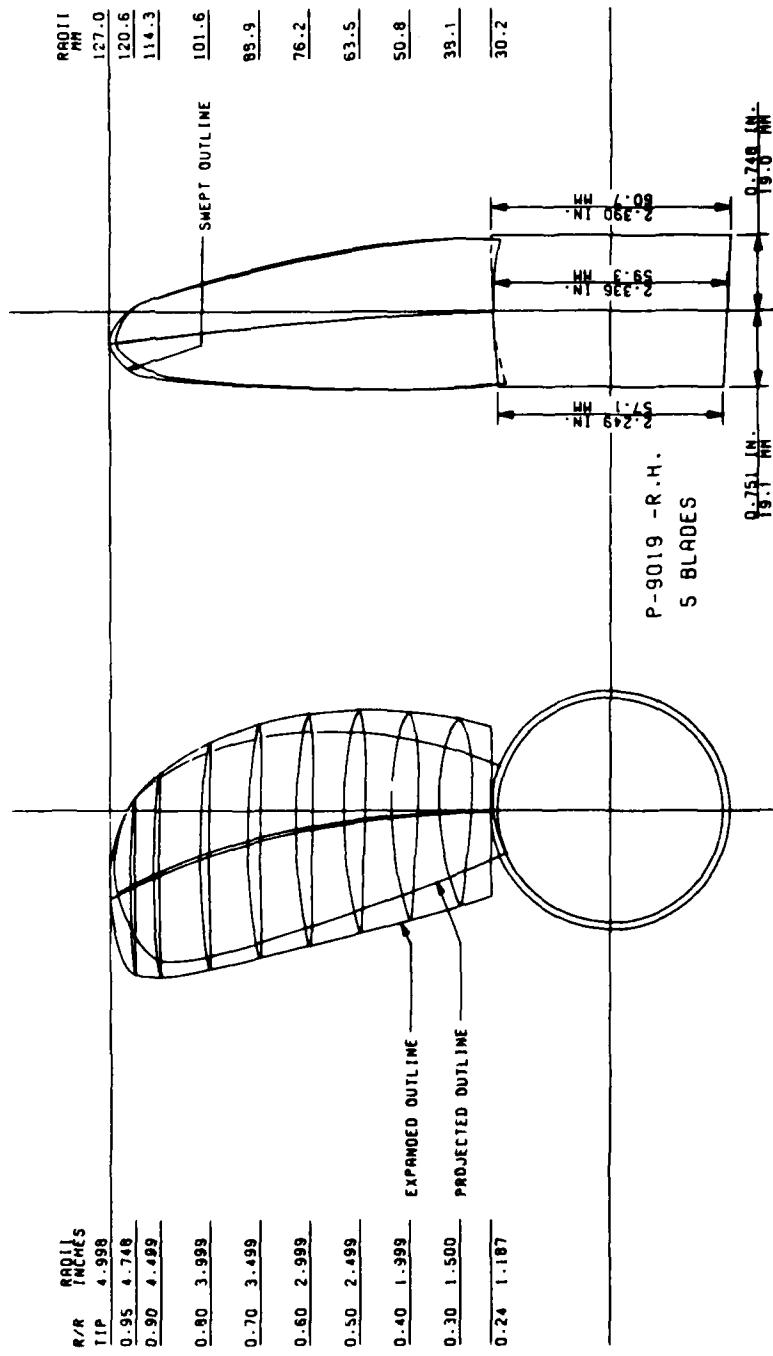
Drawing of Propeller 9019 (LIPS Forward)
